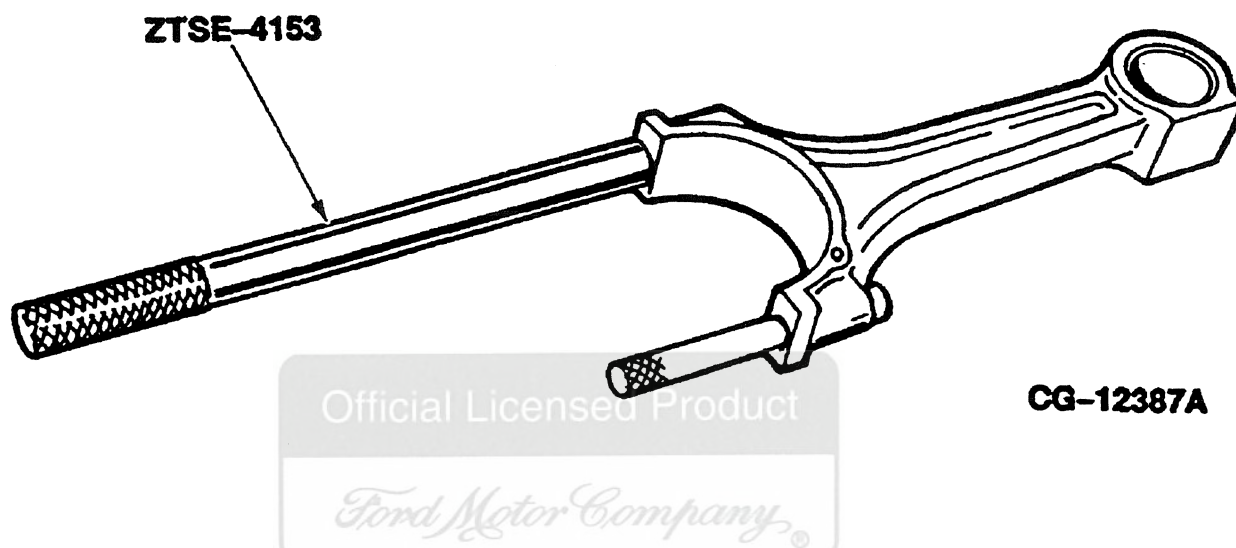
Connecting Rod Installation Guide and Protector Caps Installed on Connecting Rod Bolts
